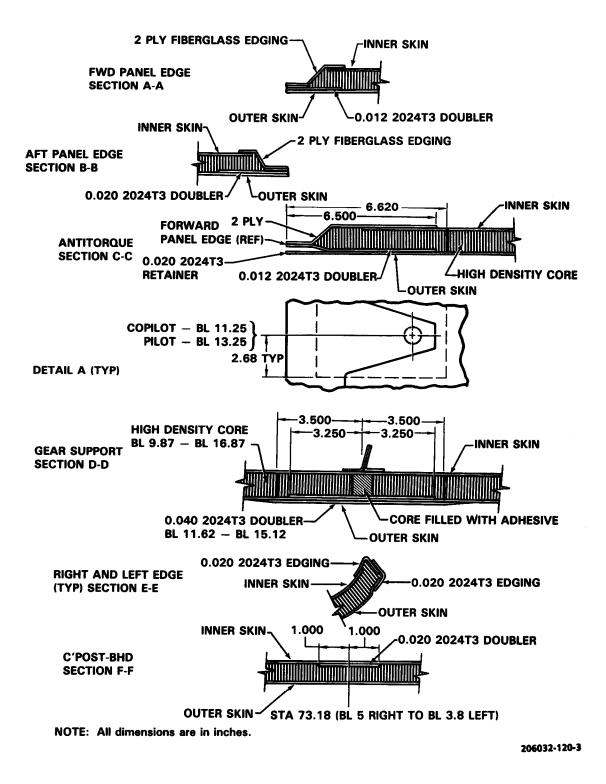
Honeycomb Panel – Forward Lower Cabin Shell Repair (Sheet 3)
